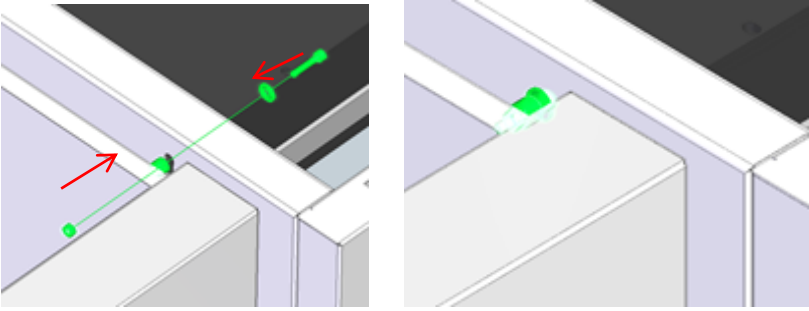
Attaching and securing the storage unit to the boiler, on the side
